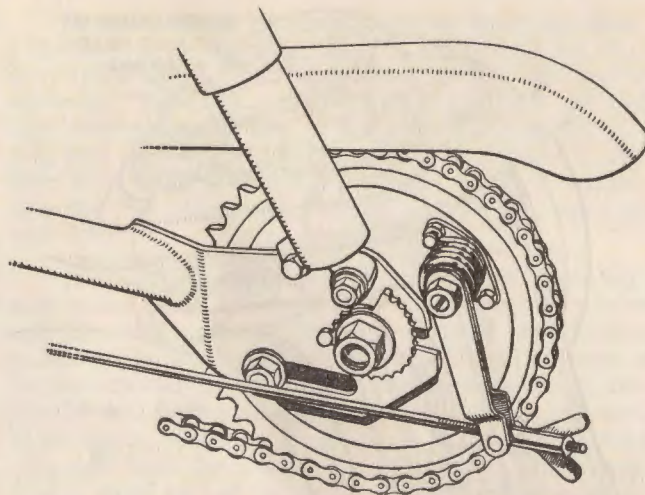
The rear chain is adjusted by slackening the wheel spindle nuts and turning the notched cam plates on either side of the wheel fork. A wing nut on the end of the brake rod adjusts the rear brake.
